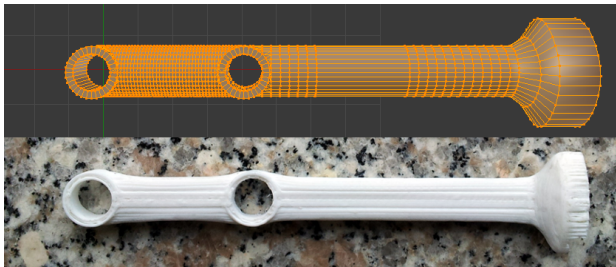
Customized holder, designed in Blender and printed on RepRap 3D printer
